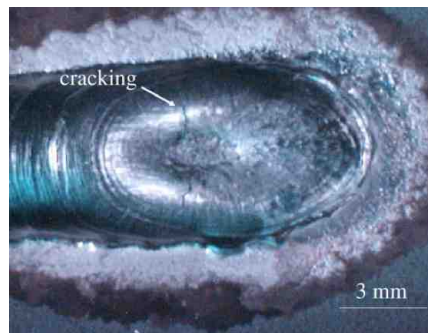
Cracking in the weld fusion zone at the end of a weld (termination crater) [29].
